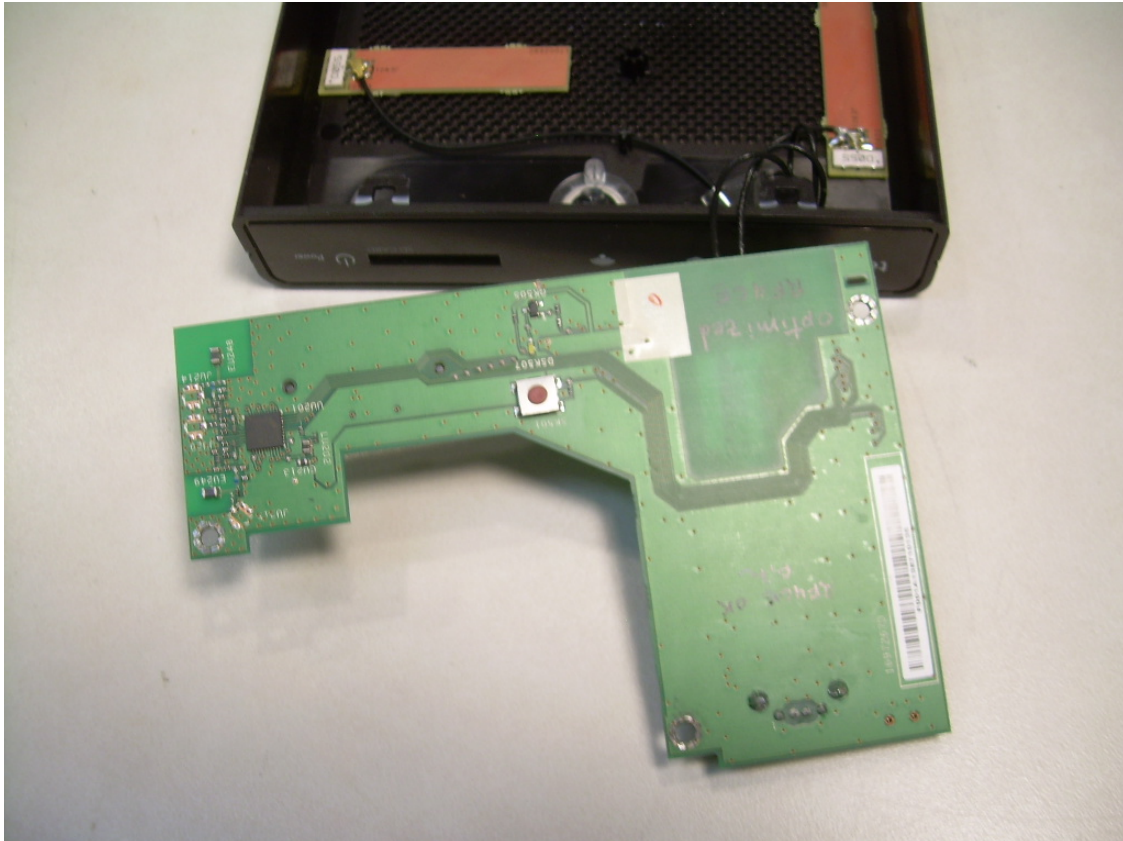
Bottom View of the Daughter Card with 802.11abgn Module Installed
